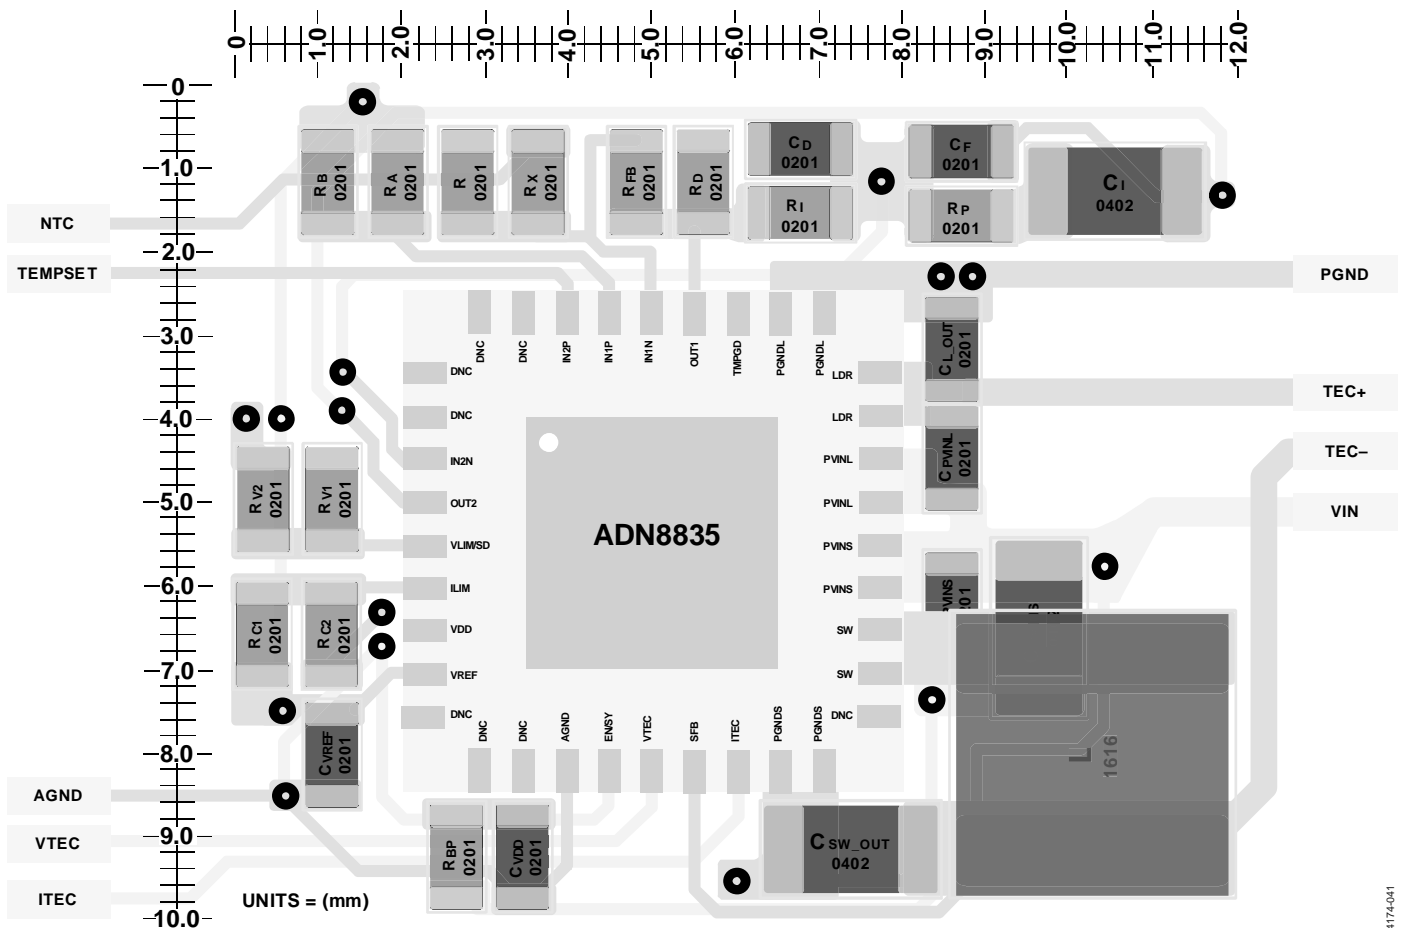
Example PCB Layout Using Two Layers (Top and Bottom Layers)
